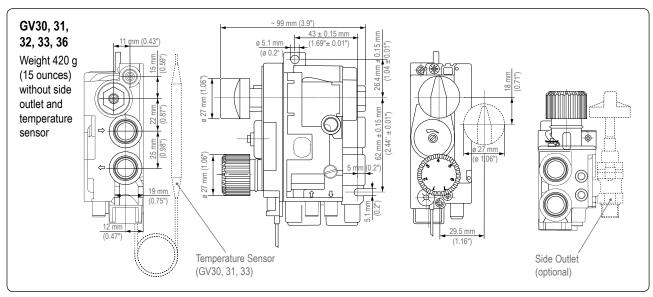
GV30, 31, 32, 33, 36 - Dimensions and Weight
